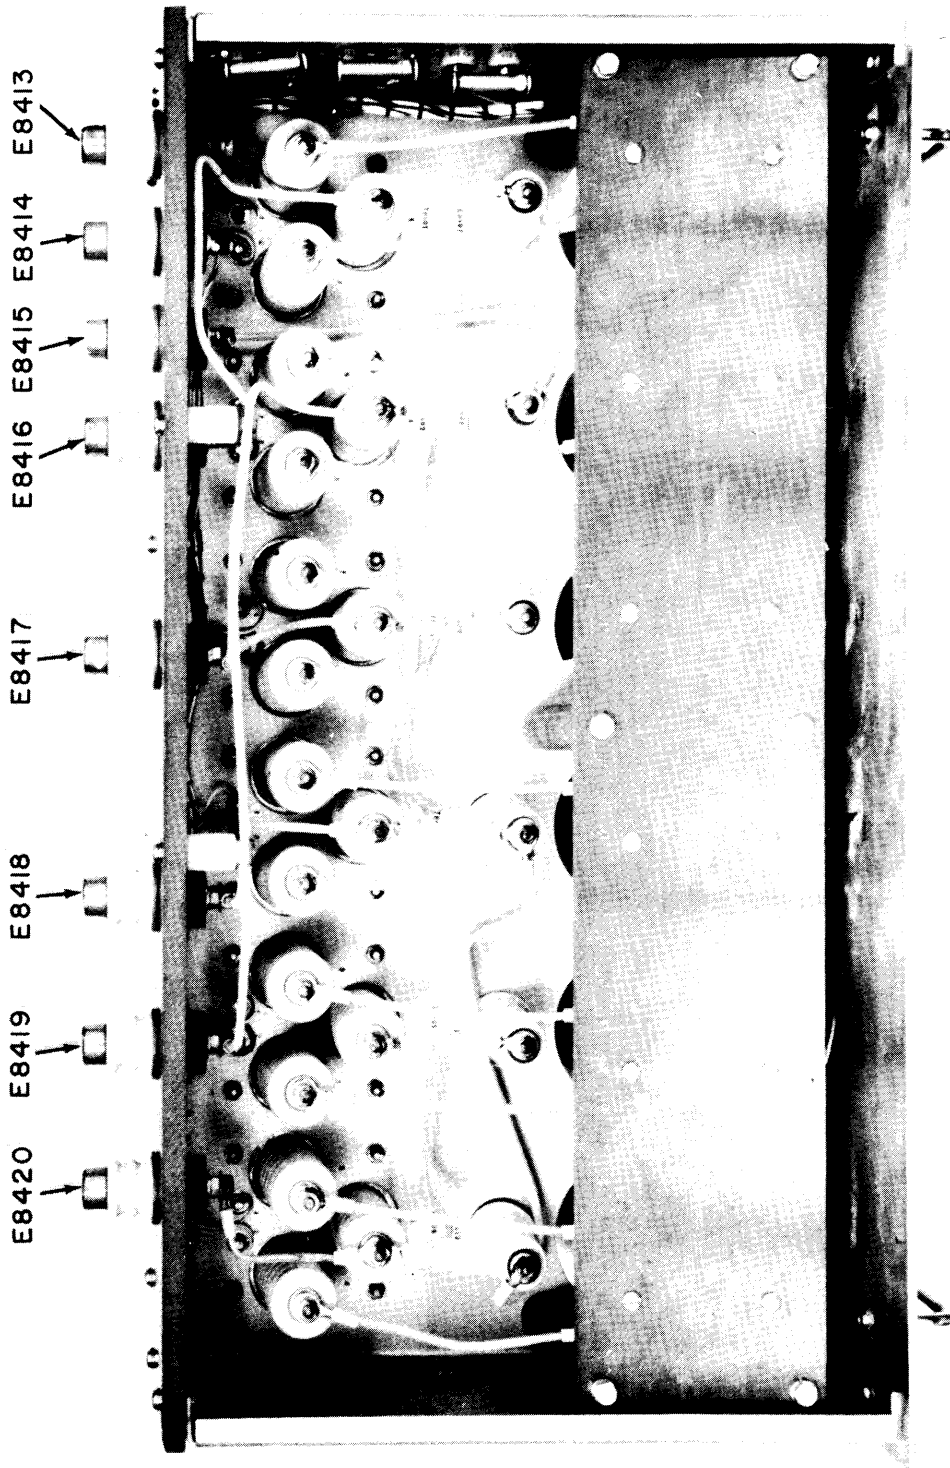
Bottom View with Callouts, High Voltage Rectifier Drawer, GPT-40K
